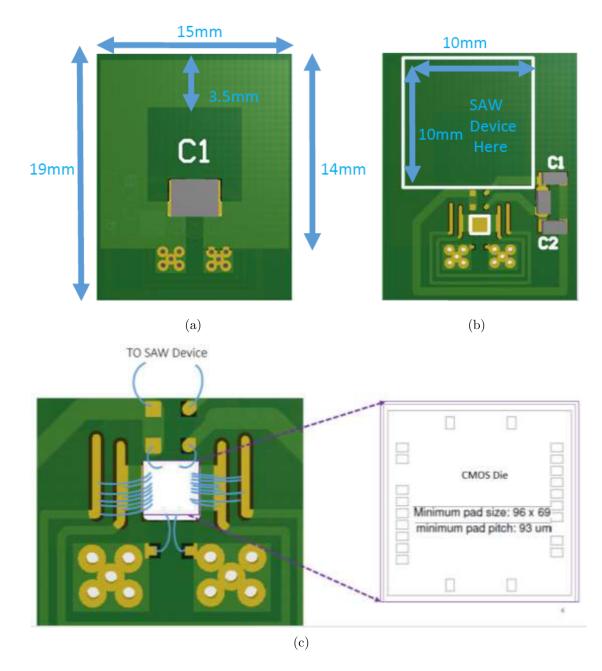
PCB used to demonstrate locomotion (a) Top view depicting receiver coil used to harvest wireless power and the capacitance in resonance with it (b) Bottom view of the PCB on which CMOS die and SAW devices are wirebonded (c) Wirebonding from pads on CMOS die to PCB- the pads on the bottom and top are respectively input to rectifier and driver output while pads on left and right are used to short control bits to VDD/VSS
